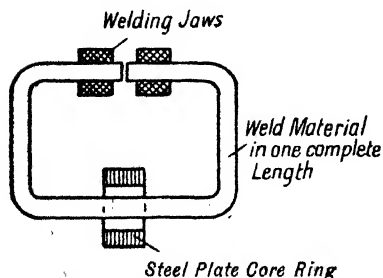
Choking the shunt effect in the welding of a closed article by means of a steel plate core ring.
